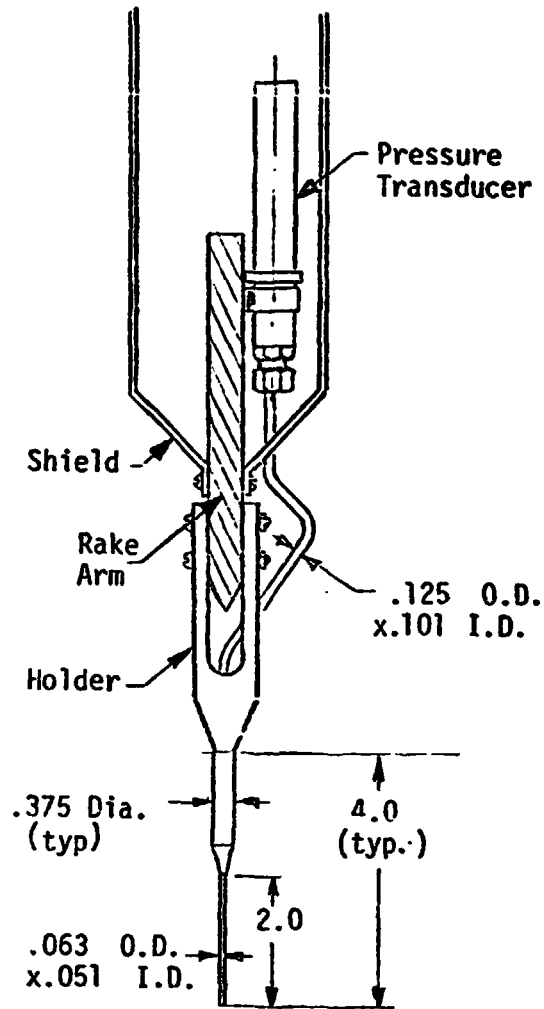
Pitot Pressure Probe Assembly (Ref. 3)
